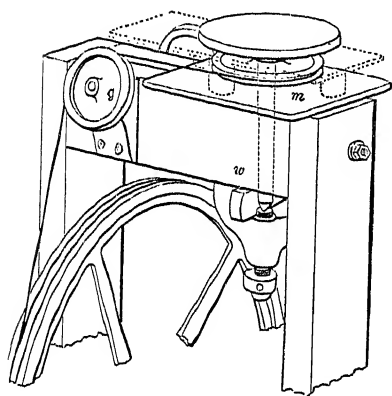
represents the upper part of a horizontal grinding machine used for more carefully grinding and setting the edges of cutting tools by means of revolving laps of metal fed with the various abrasive powders. The lower part of this apparatus exactly resembles that of the vertical grinding machine, fig. 5, but to place the sides of the laps in a horizontal position, the apparatus is furnished with a vertical spindle or mandrel, upon which the laps are screwed after the manner of chucks upon an ordinary turning lathe. The mandrel is mounted in a rectangular frame of cast iron, which fits between the bearers and is secured in its place by a wedge beneath, as shown at *w*. The upper side of this frame is made as a platform, and is fitted in the centre with a cylindrical steel collar, within which the mandrel revolves while its lower end rests upon a centre screw passing through the bottom of the iron frame: by means of which the mandrel can be elevated to the required position, nearly level with the upper metal platform, which latter is dotted in the drawing, and serves as a support for the tools. This second platform stands upon three feet, fitted with pins that enter corresponding holes in the under platform; by which arrangement the upper platform can be readily removed when the laps are exchanged. The band for driving the mandrel proceeds from the foot wheel over the two oblique guide pulleys *g*, to the pulley *m*, fixed on the vertical mandrel, and the tension of the band is adjusted by shifting the mandrel frame to the right or left upon the bearers.
